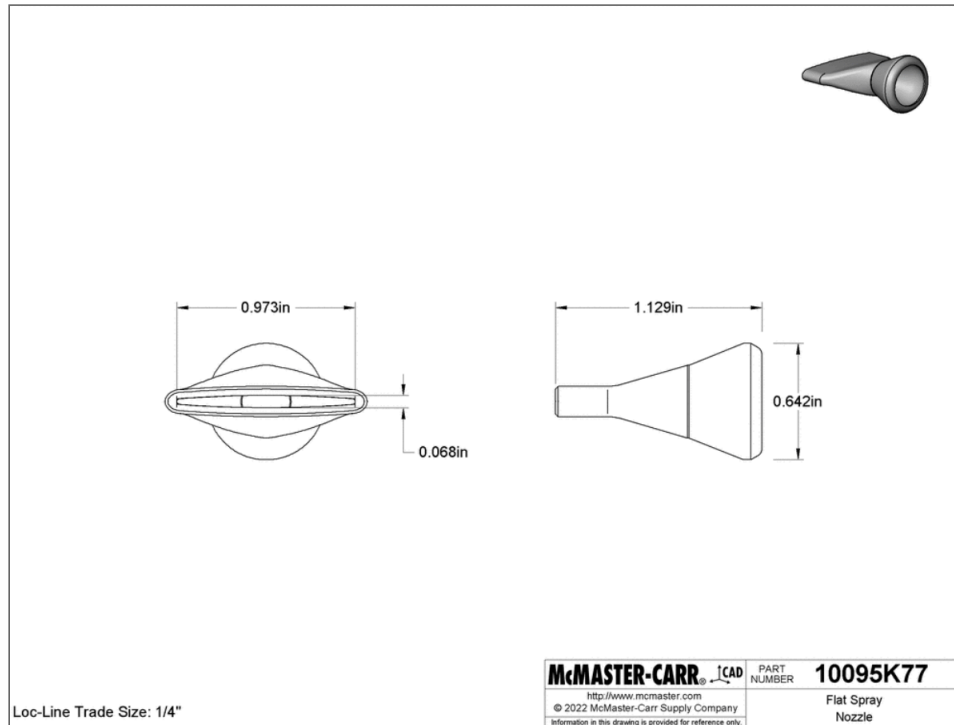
McMaster-Carr Nozzle Drawing, PN 10095K77 [11]
